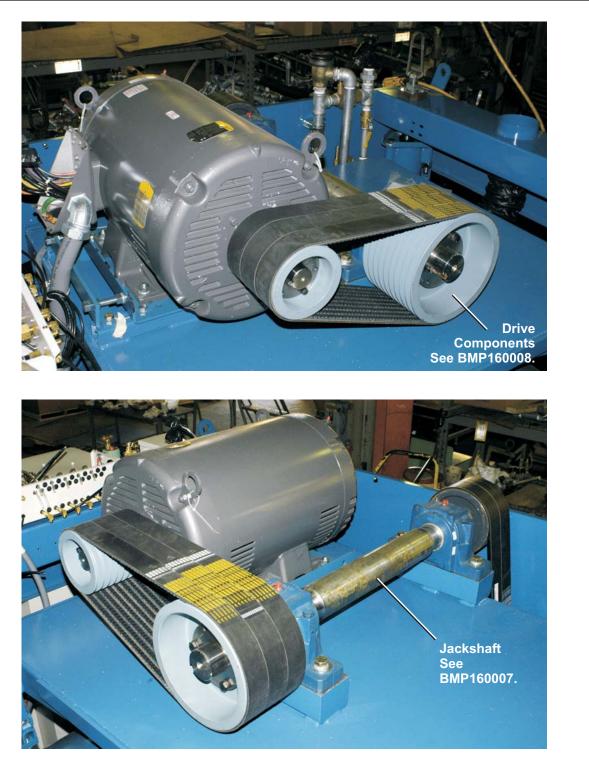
Motor mount, drive shaft, and pillowblock bearings
